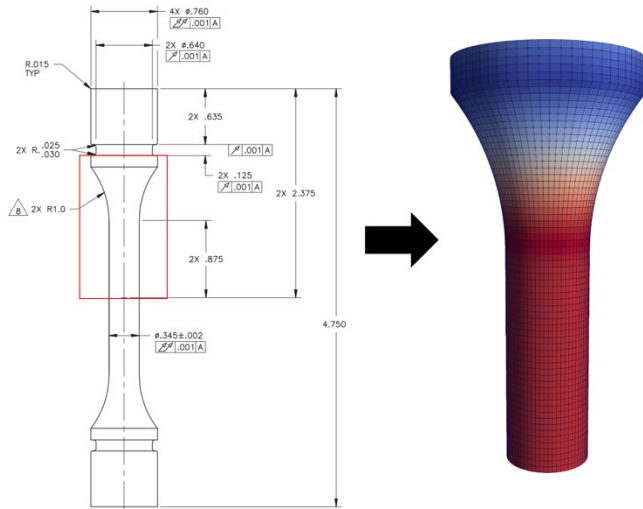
DRAWING FOR TENSILE “DOG-BONE” SPECIMEN. THE RED BOX OUTLINES THE SECTION OF THE COMPONENT USED IN THE FE MODEL, WHICH IS SHOWN TO THE RIGHT. DRAWING DIMENSIONS ARE SHOWN IN INCHES, ALTHOUGH ALL ANALYSES USED METRIC UNITS.
